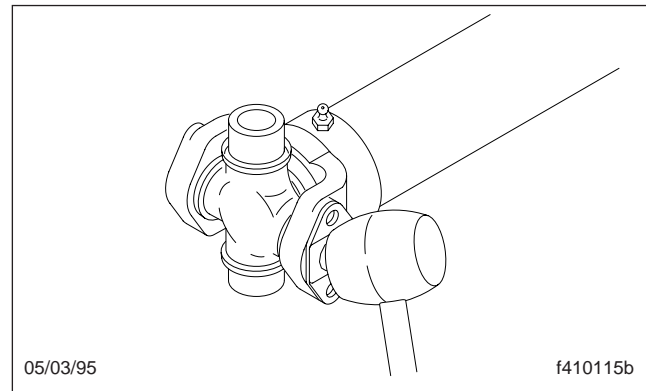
, Seating a U-Joint Bearing Cup In a Full-Round Yoke
